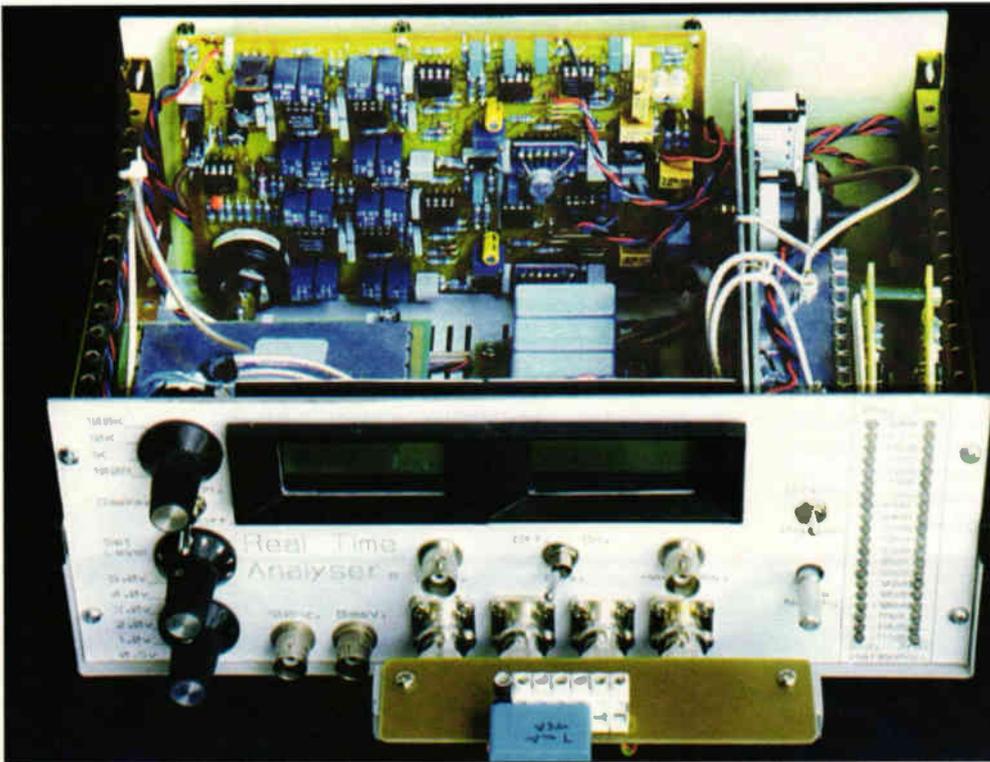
The same assembly now viewed from the front shows the Real Time printed board mounted on the case back panel. This view also shows the added insulation inserted between the LED display board and the notch filter/preamp case lid.
